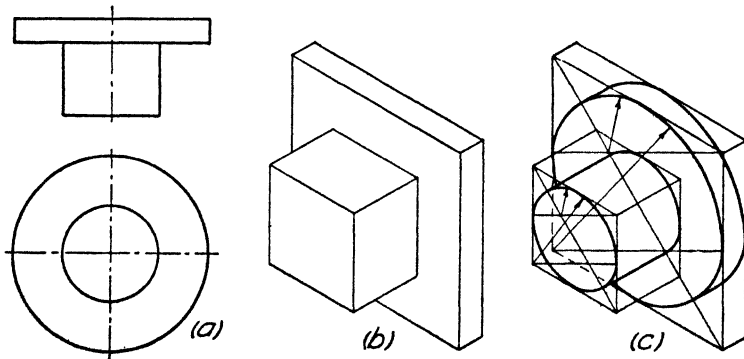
Steps in making an isometric drawing of a cylindrical object.
